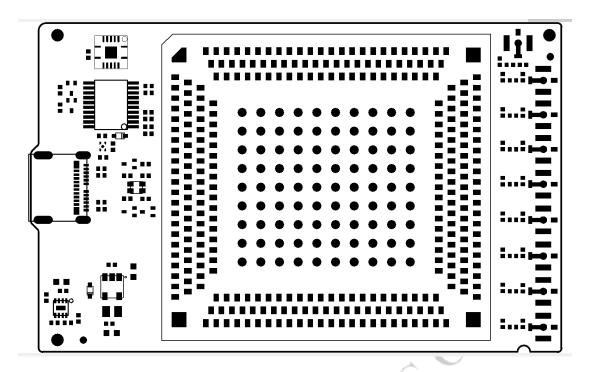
5G S-Module All-in-one Type-L Pin Layout top view
